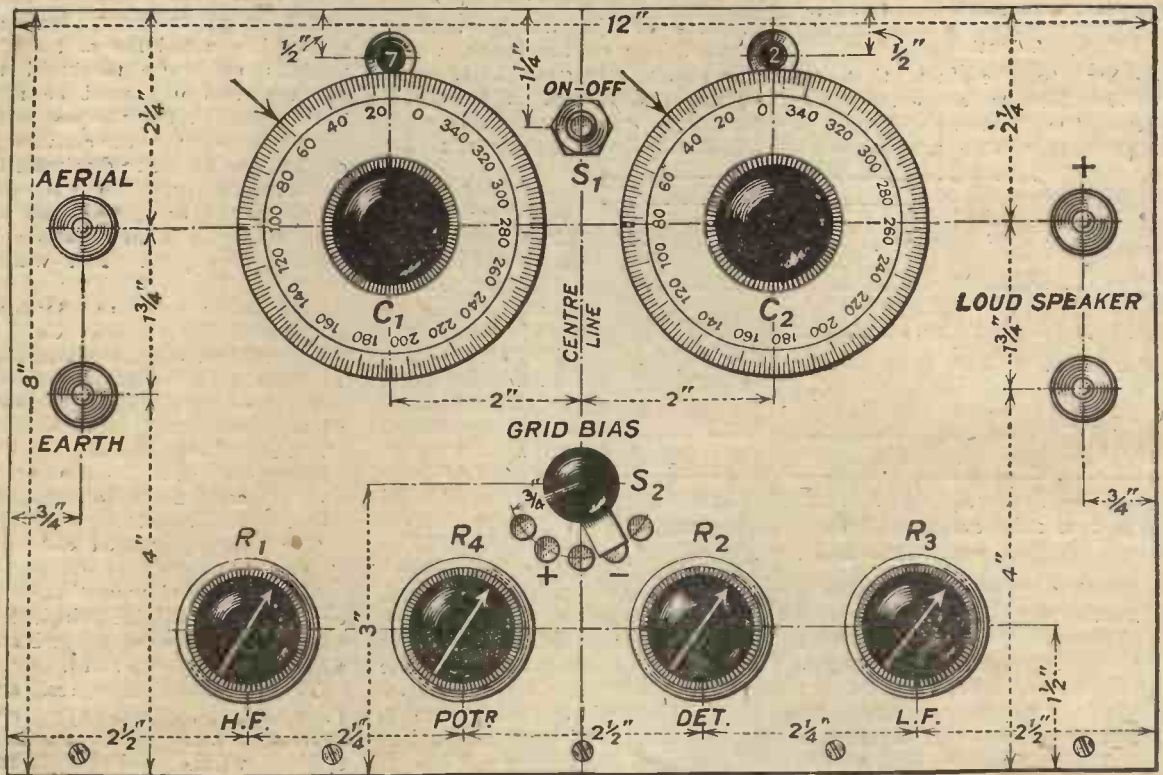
The panel layout. Readers may obtain a full-size drilling blueprint, No. C1028A, price 1/6, post free.
